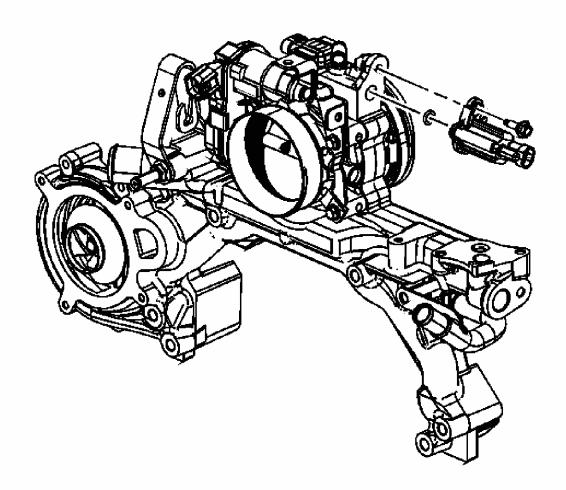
View Of EVAP Canister Purge Solenoid Valve & Bolt Courtesy of GENERAL MOTORS CORP.
